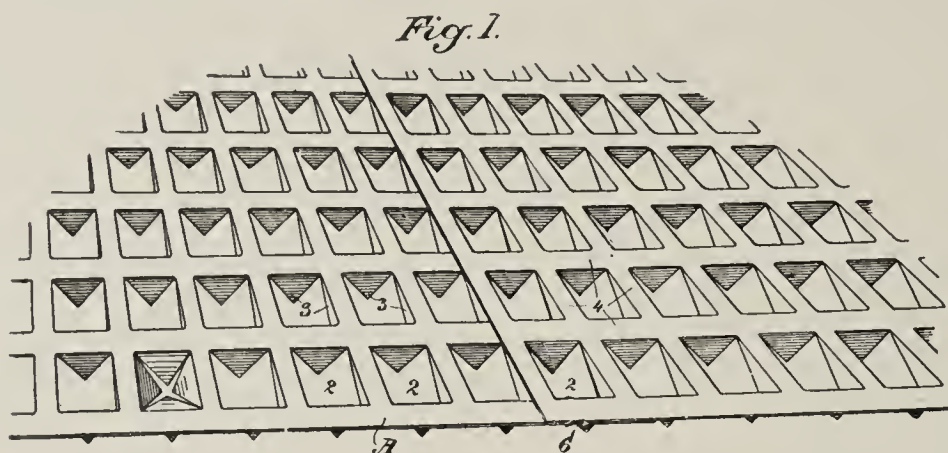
is a view of a section of a plate showing one arrangement of the openings and burs. Fig. 2 is a view of the opposite side, showing contiguous sheets overlapping and the burs interlocked.
